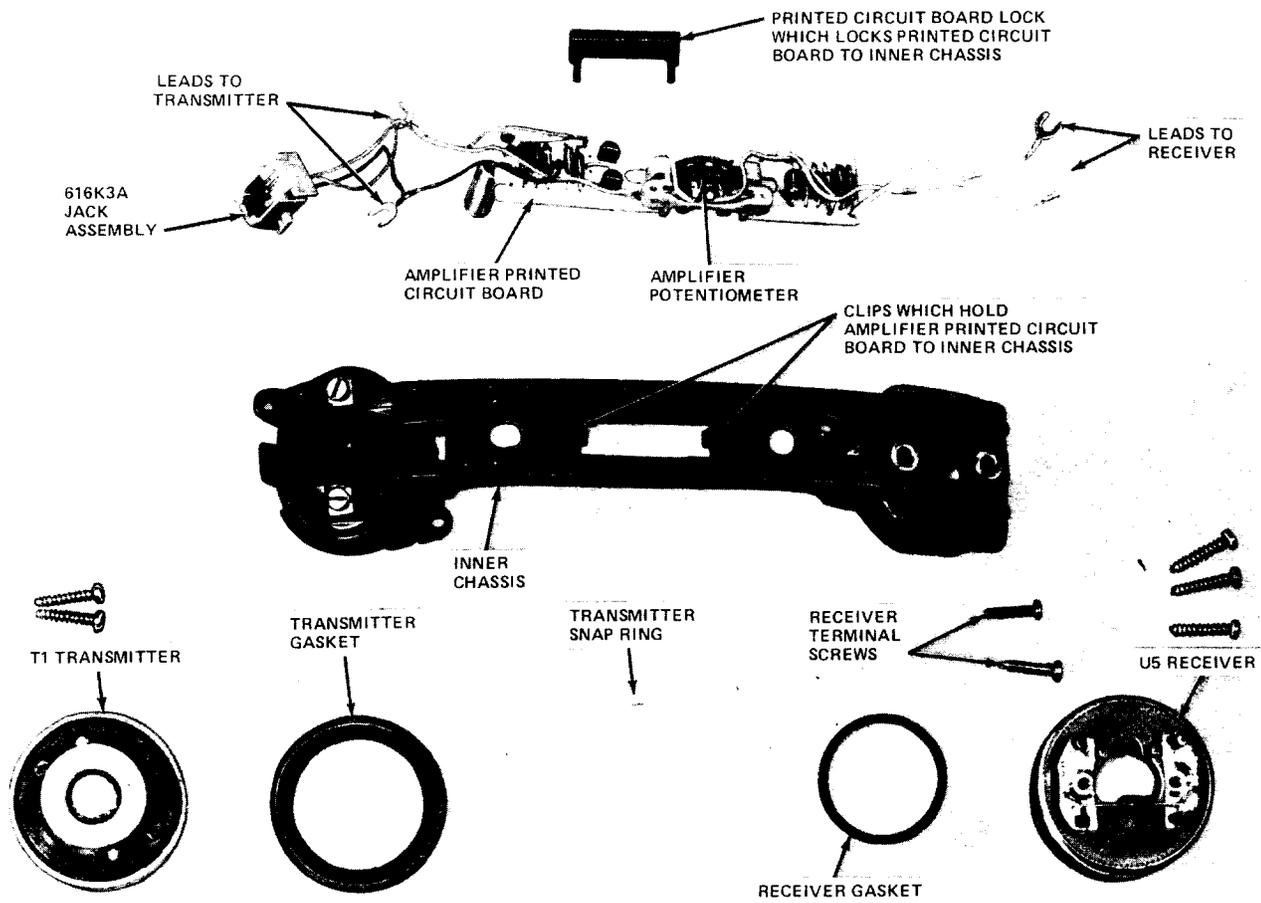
K6-Type Breakdown of Impaired Hearing Handset Inner Chassis
